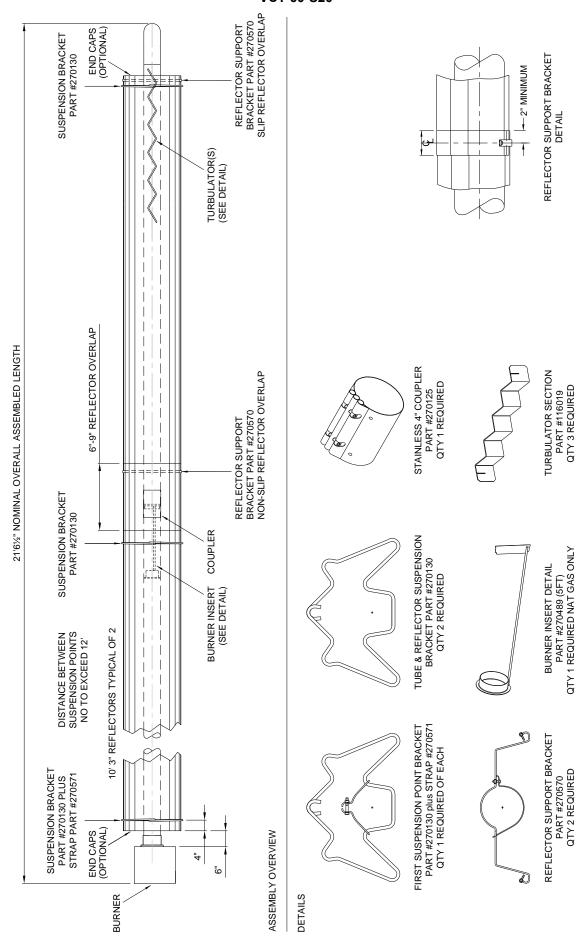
Heater Assembly: Model Linear VCS 60-S30, 80-S30, 100-S30, 125-S30 VCT 60-S30, 80-S30, 100-S30, 125-S30
